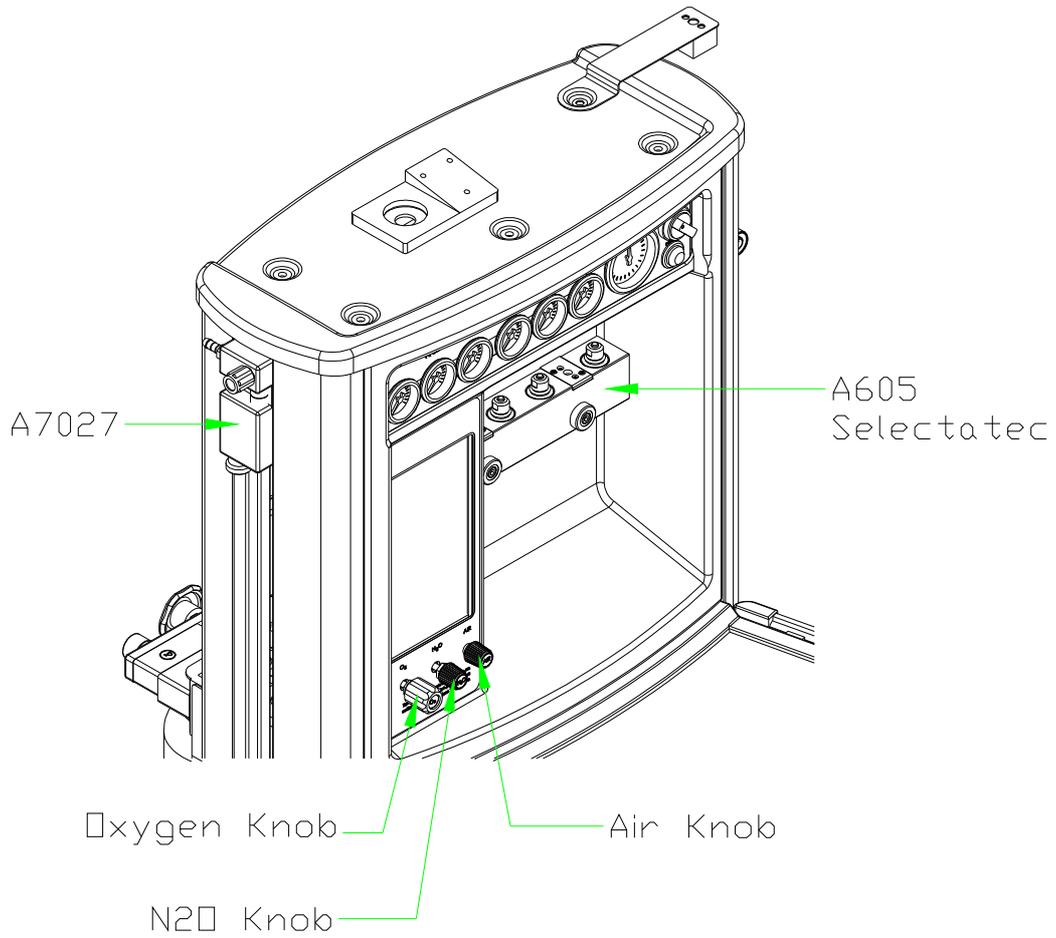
Location of A7027 Scavenger on Anaesthetic machine
